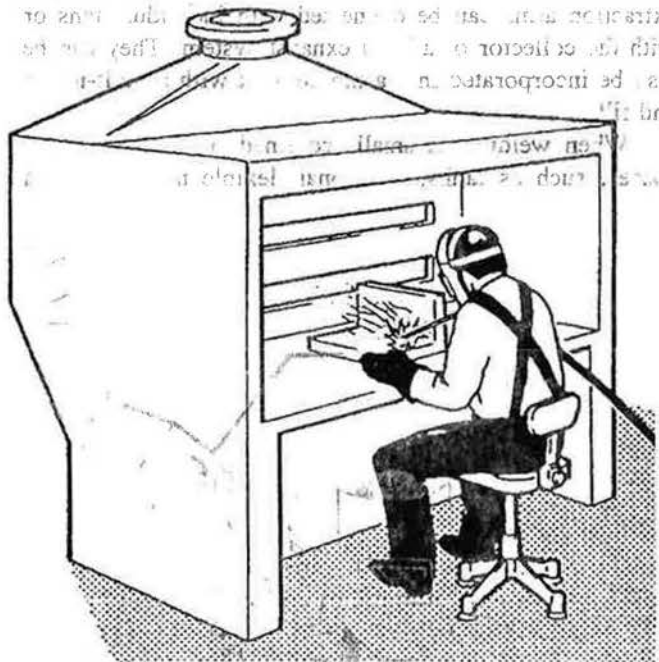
Crossdraft welding bench enclosed at the sides, back, and top.
